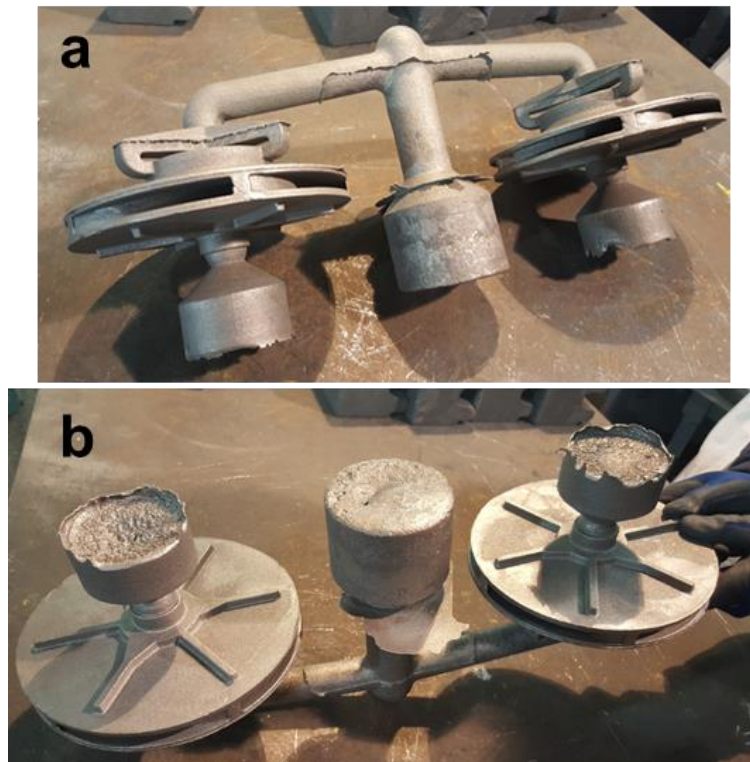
View of the impellers after casting, cooling, and mould separation: (a) top view, (b) downside view.
